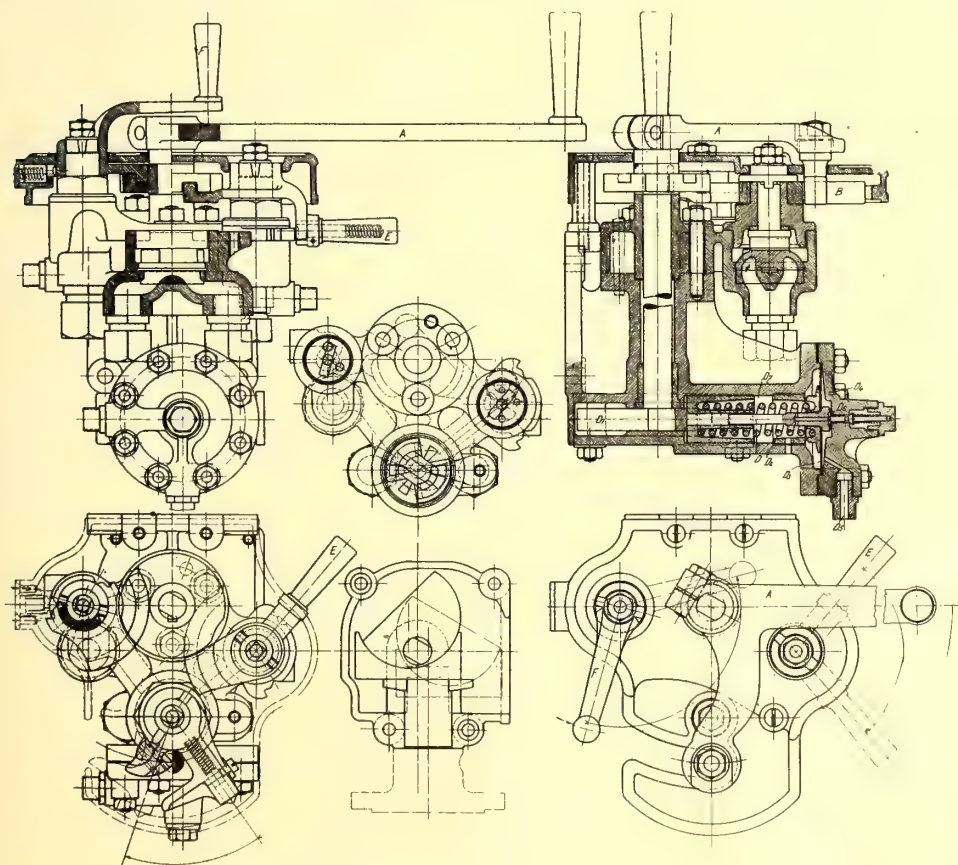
SECTIONS OF MASTER CONTROLLER
